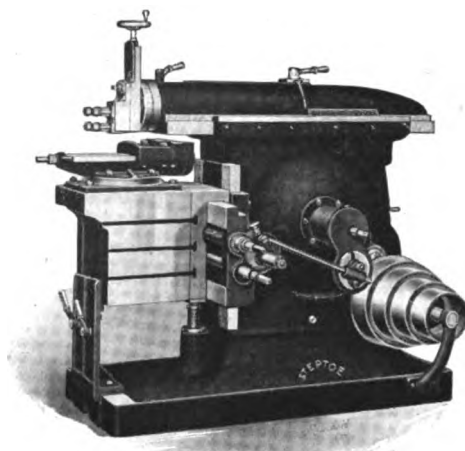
24-Inch Back Geared "Steptoe" Crank Shaper
